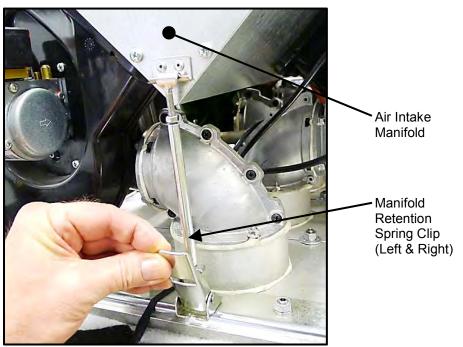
Unlatch Spring Clips from Left and Right Side of Manifold (Step 5)
